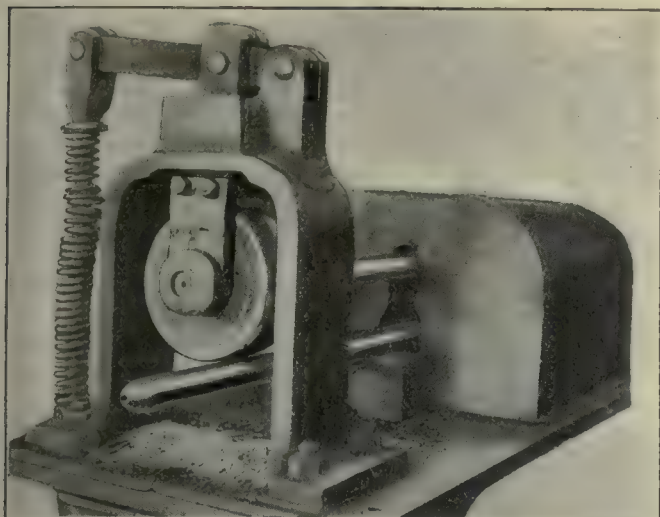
SIMPLEST FORM OF ROLLING MACHINE
